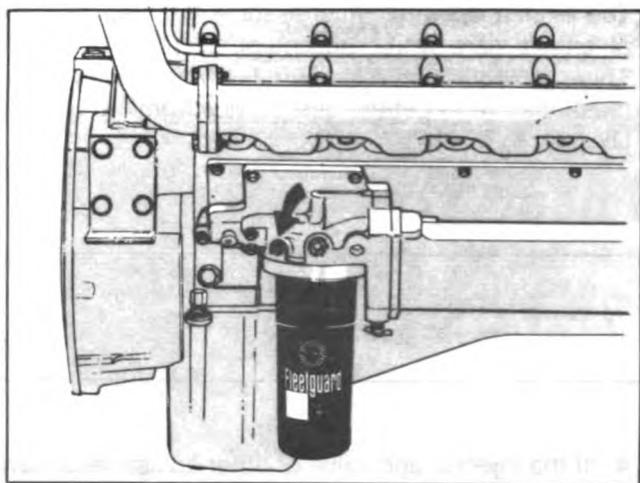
, (OM1002L). Lubricating system priming point—VT-903 C.I.D. Engine
